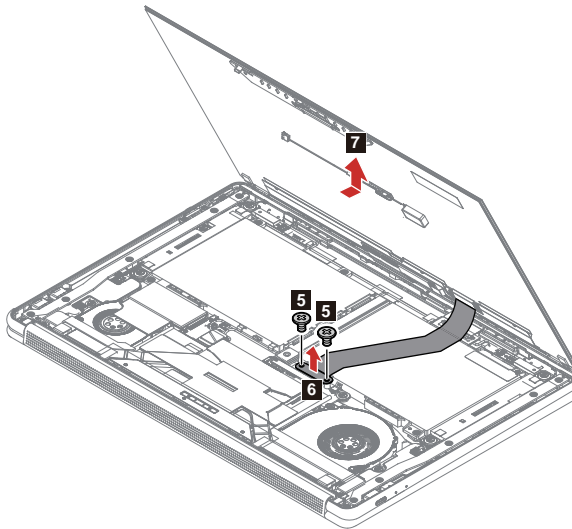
Remove screws, release the EDP cable assembly, and remove the C cover LCD panel
